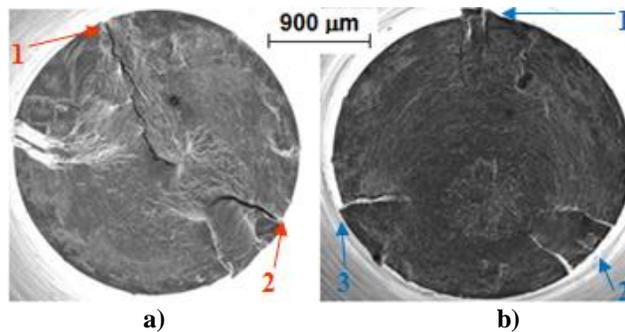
Fracture surface with high applied load and two points of crack initiation a), fracture surface with 3 points of crack initiation that converge to the granular zone b).
